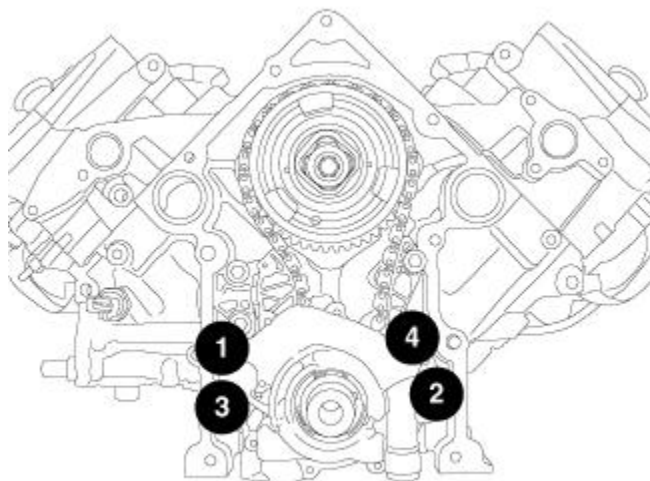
Oil Pump Retaining Bolt Tightening Sequence
